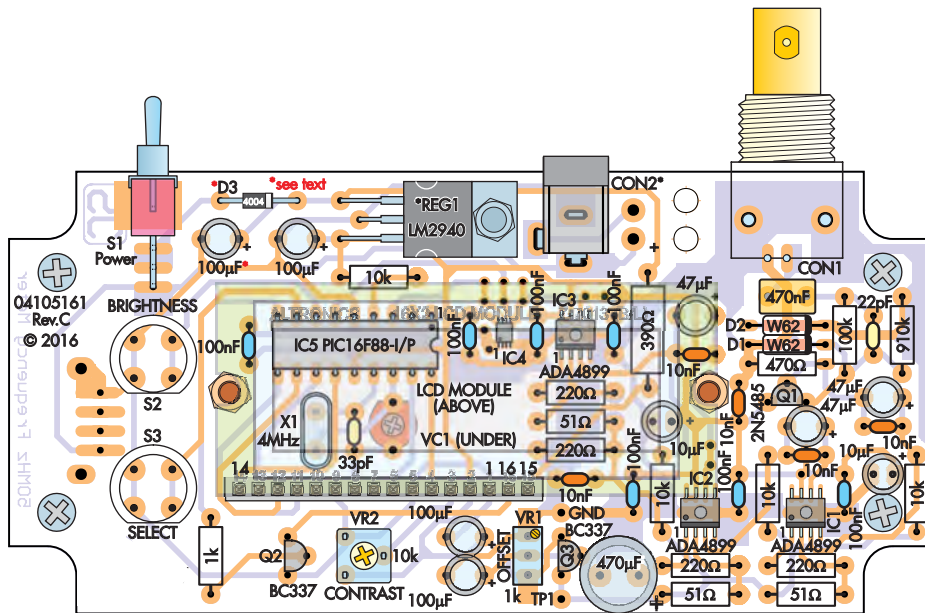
TOP OF PCB WHEN USING 9V DC SUPPLY
